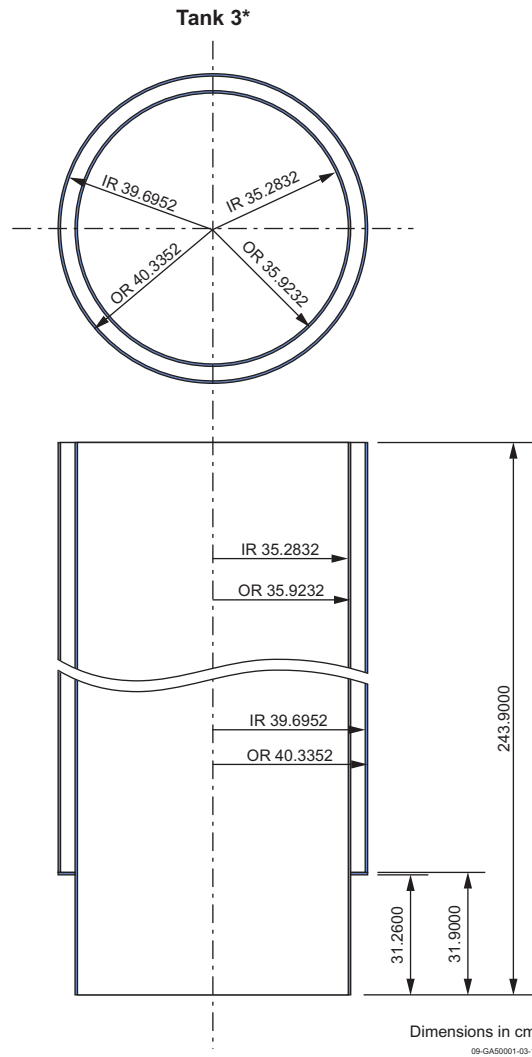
Tank 3* Dimensions Simple Model, Bottom 31.26 cm is the Extended Skirt.
